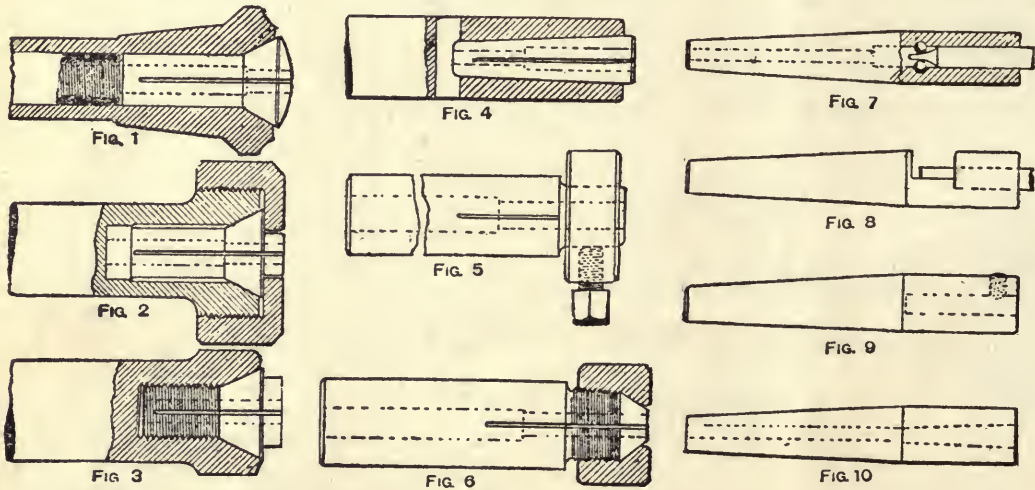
is a common form of hollow spindle chuck, with draw in spindle engaging from the back, this being undoubtedly one of the readiest, truest and most secure means for holding this class of tool. Where the use of the draw spindle is impossible or inconvenient, however, a modification of this chuck becomes necessary. Two methods are shown at Figs. 2 and 3. Although somewhat more bulky than the others, that shown at Fig. 2 is an excellent device, and its value increases if the tool to be used are of various sizes. The inserted spring collet—not the simplest part to replace—having no threads, lasts a long time. This cannot be said of either of the devices shown at Figs. 1 and 3. In both cases a stripped thread would give a lot of trouble, while one worn chuck, if sets are used, may cause complications necessitating the making of a new screwed spindle and perhaps chucks as well.
